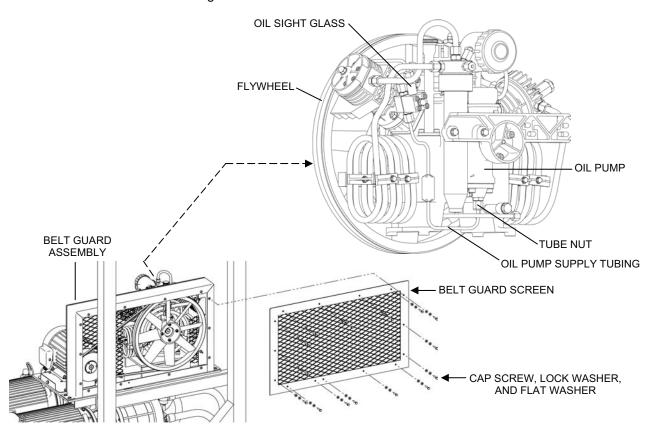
Air Compressor Oil Pump Supply Tubing and Flywheel.
